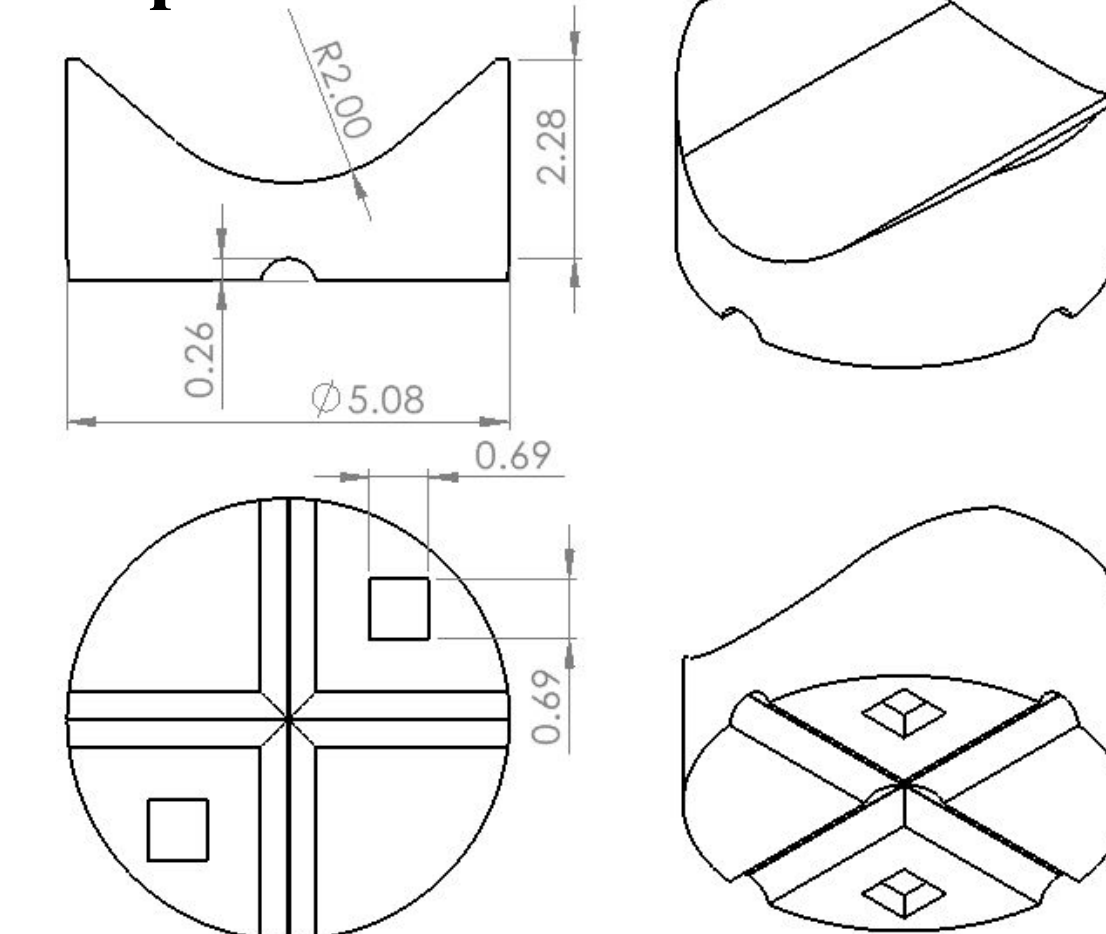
Top part / catheter saddle; this piece magnetically attaches to the top of the middle piece over the sterile drape and holds the catheter handle on top; dimensions listed in cm.
